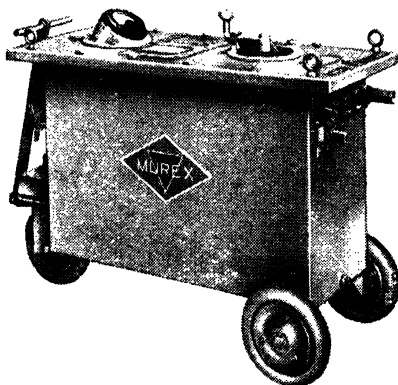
Portable 250 Ampere Transformer Equipment.
